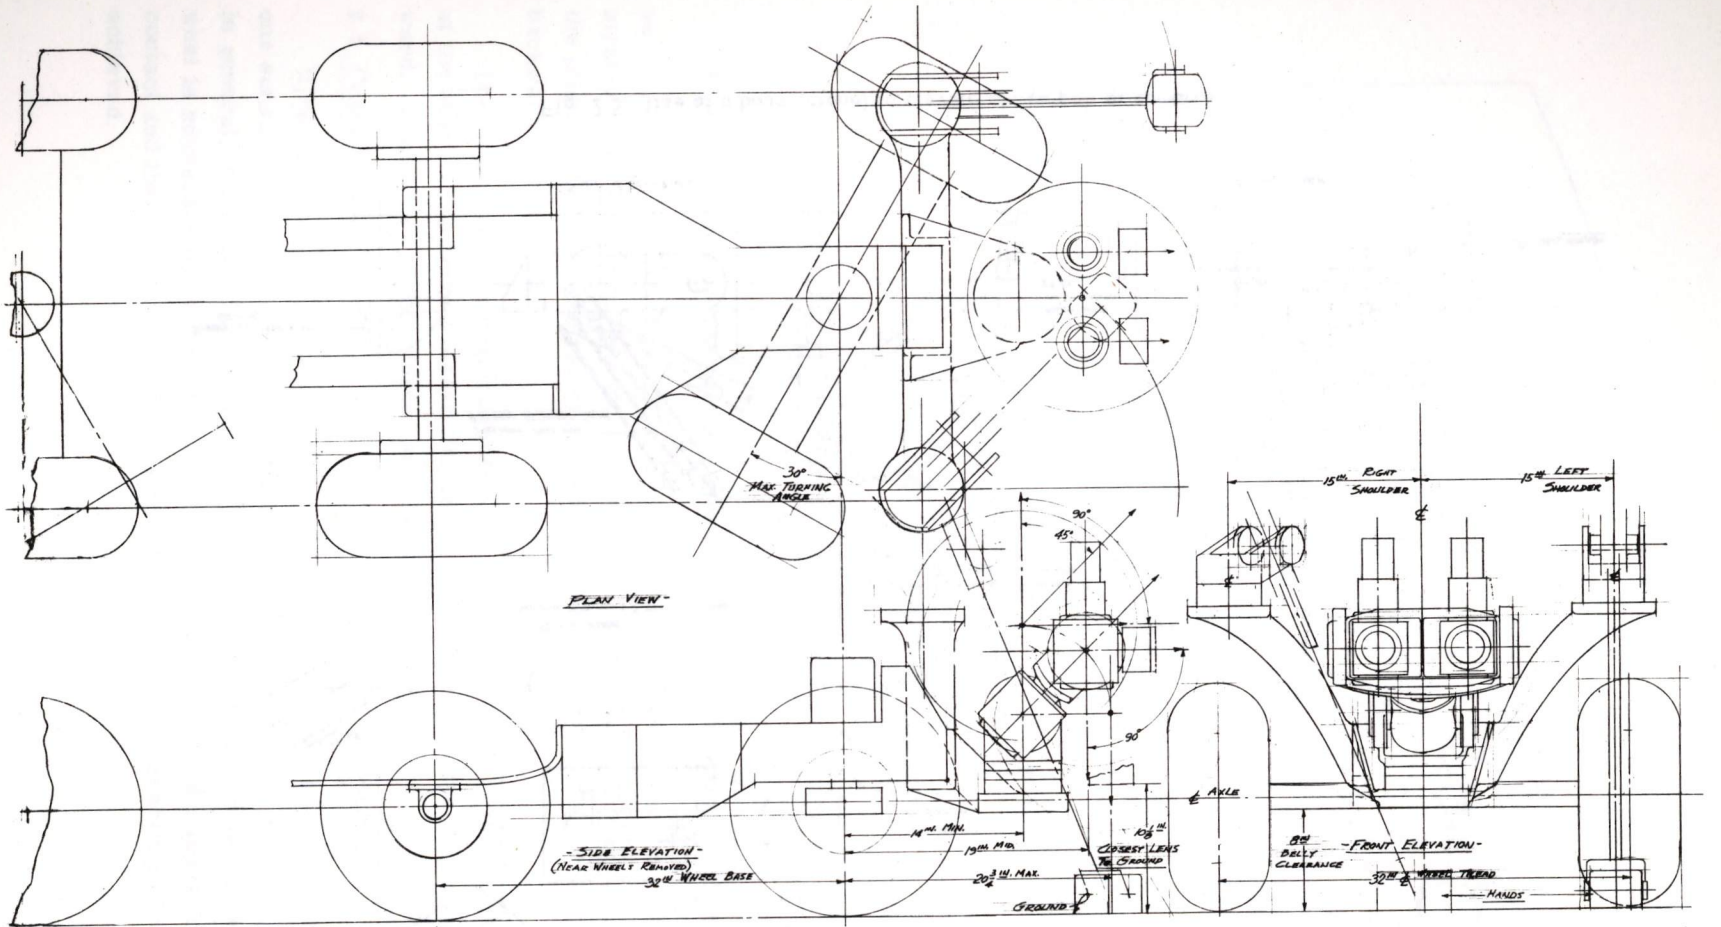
Camera assembly E mounted in front of forward axle of General Motors six-wheeled vehicle.
